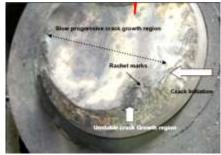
Bend Pulley and its fracture Surface
